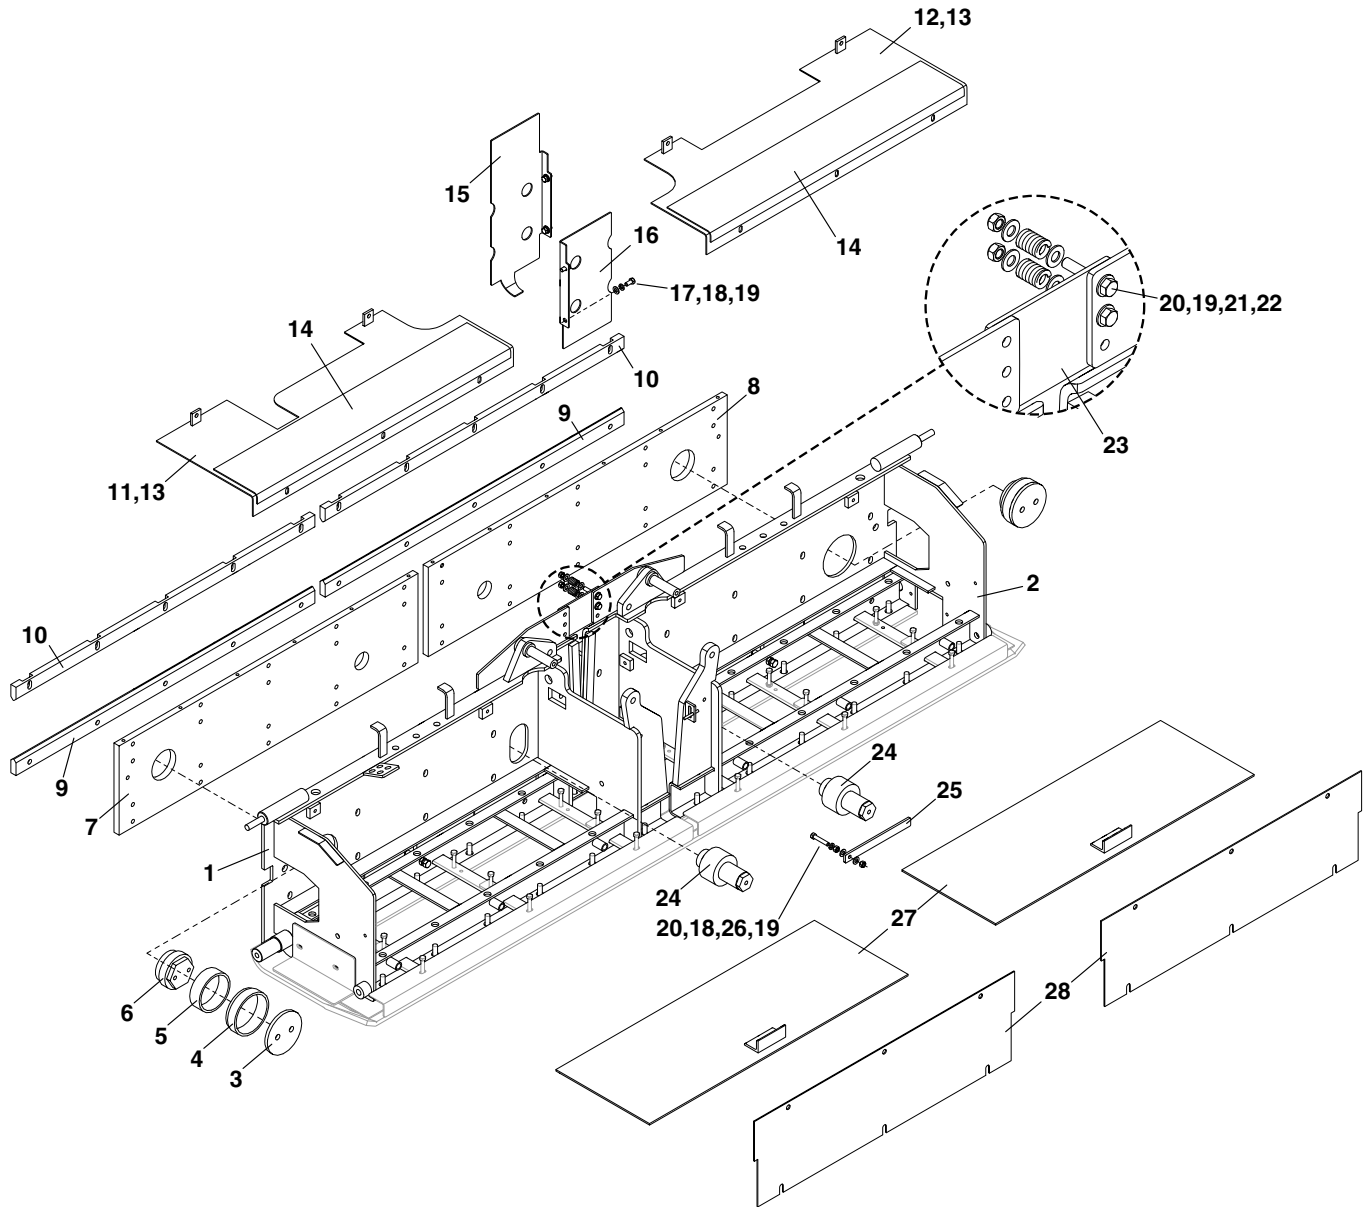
HD Screed Frame Assembly (1 of 2)
